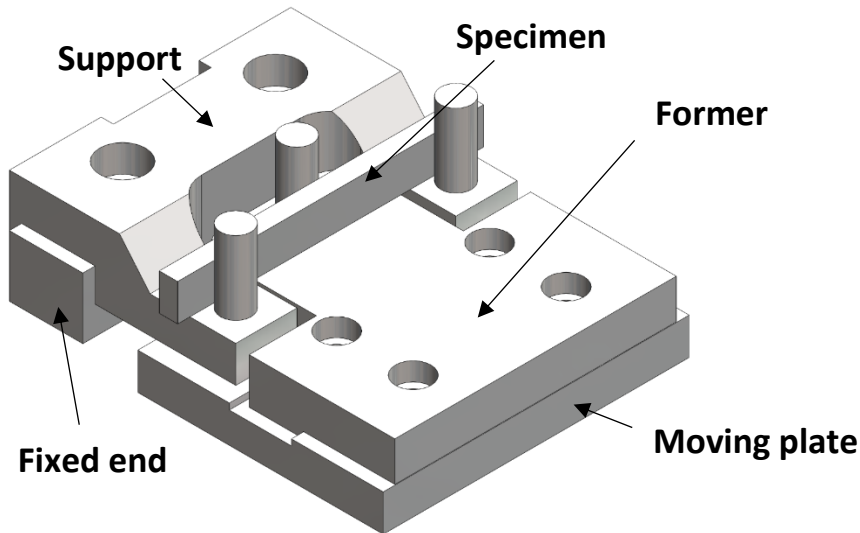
Solidworks [107] assembly of the Deben bend test tooling, showing the support, former and mounting plates.
